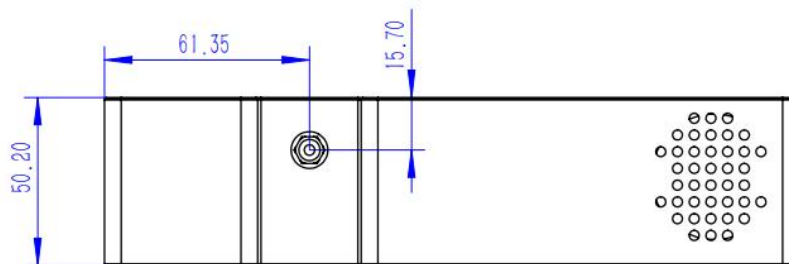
Mechanical Dimensional Drawing (Horizontal View)
